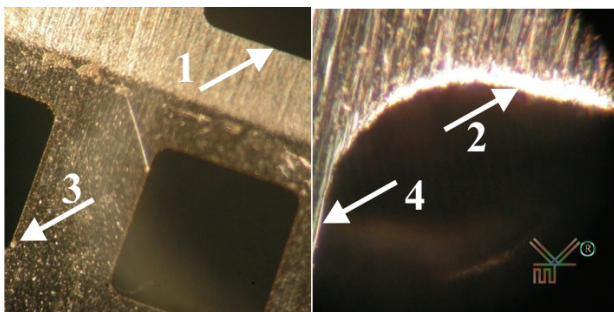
Surface of a laser cut stencil after mechanical processing: 1 - processed edge front side, 2 – processed edge back side, 3 – spatter of metal, 4 – edge in the direction of the processing.
